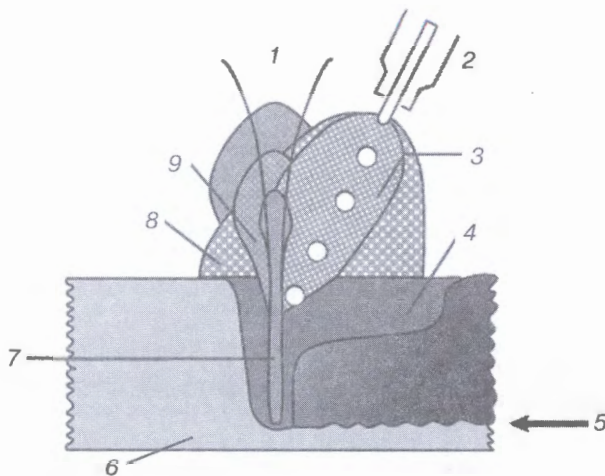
Schematic representation of the laser-MIG welding process: 1 – laser beam; 2 – arc electrode; 3 – arc; 4 – fusion zone; 5 – welding direction; 6 – workpiece; 7 – vapour cavity; 8 – plasma; 9 – laser-induced metal vapour
